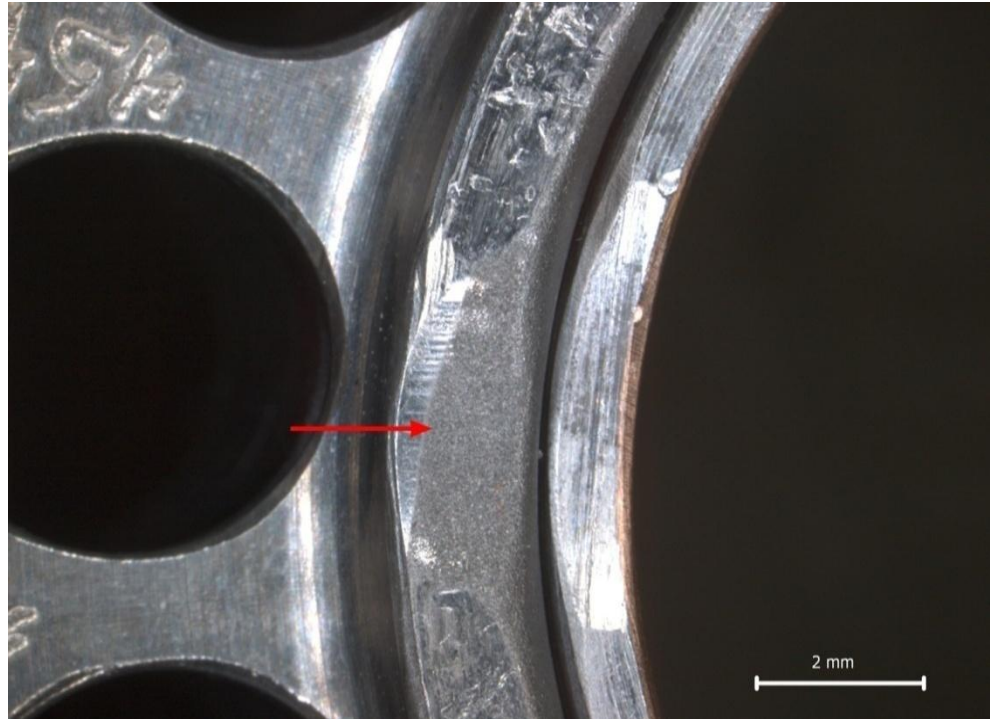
Photograph of the sun gear showing complete 'machining' wear of the teeth that had normally engaged with the planet gears
